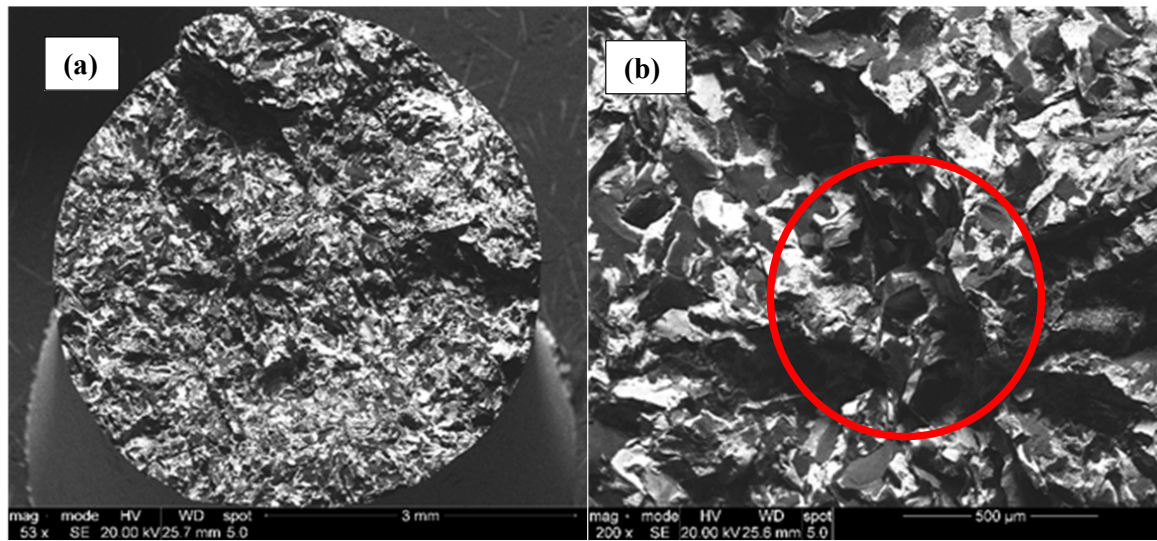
Fractography of the fractured surface of a EN-GJL-250 specimen using SEM. (a) the fractured surface, (b) the crack initiation area
